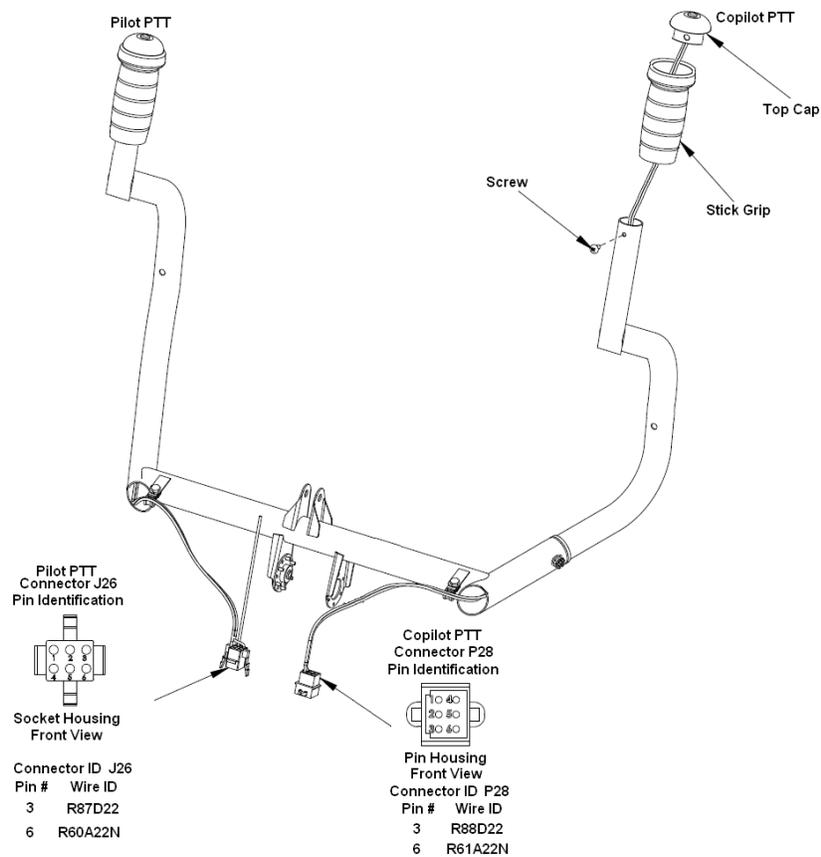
Details of the Pilot's/Copilot's Push-To-Talk Switch Assembly
